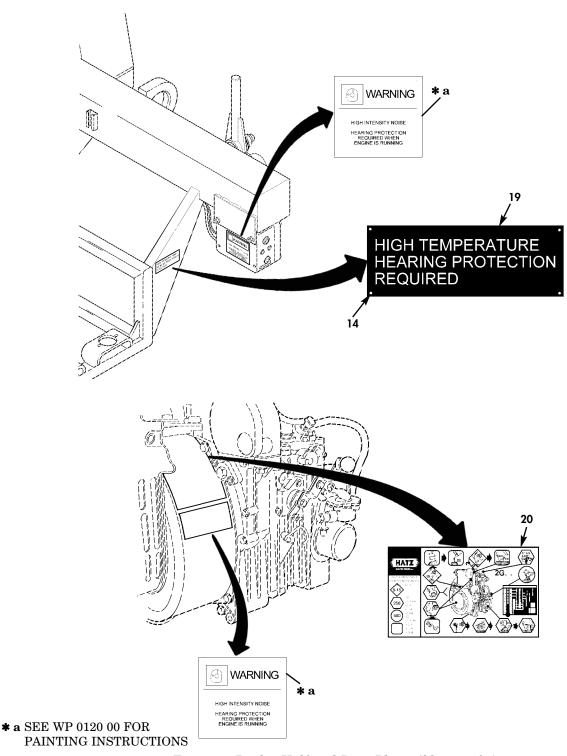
Bridge Half and Data Plates (Sheet 4 of 4).
